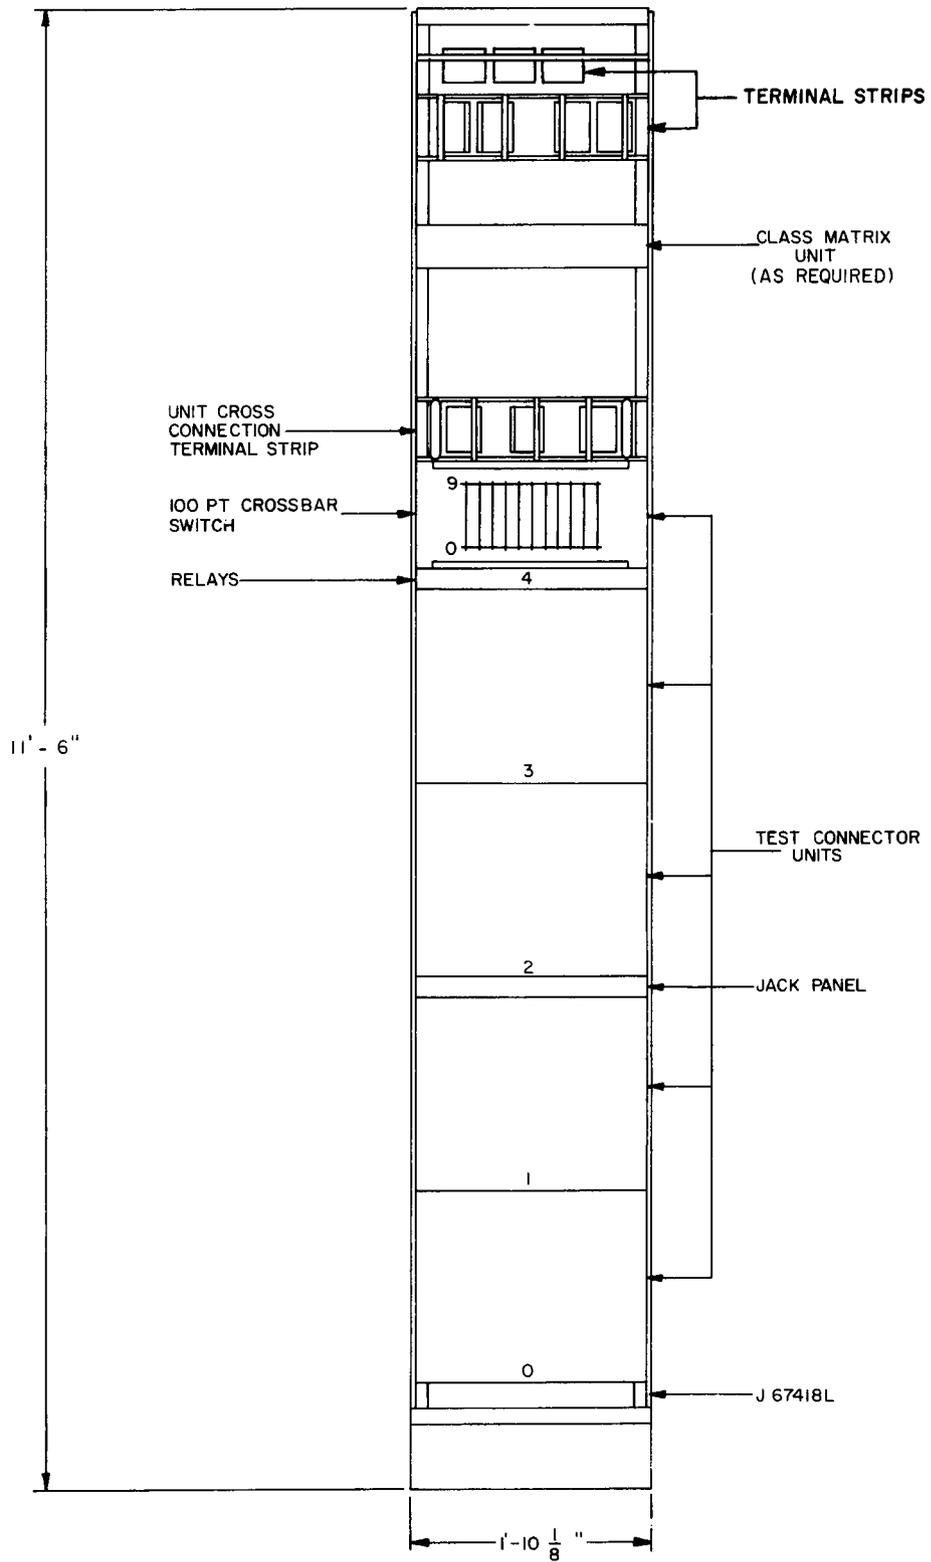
Automatic Outgoing Toll Connecting Trunk Test Connector Frame
